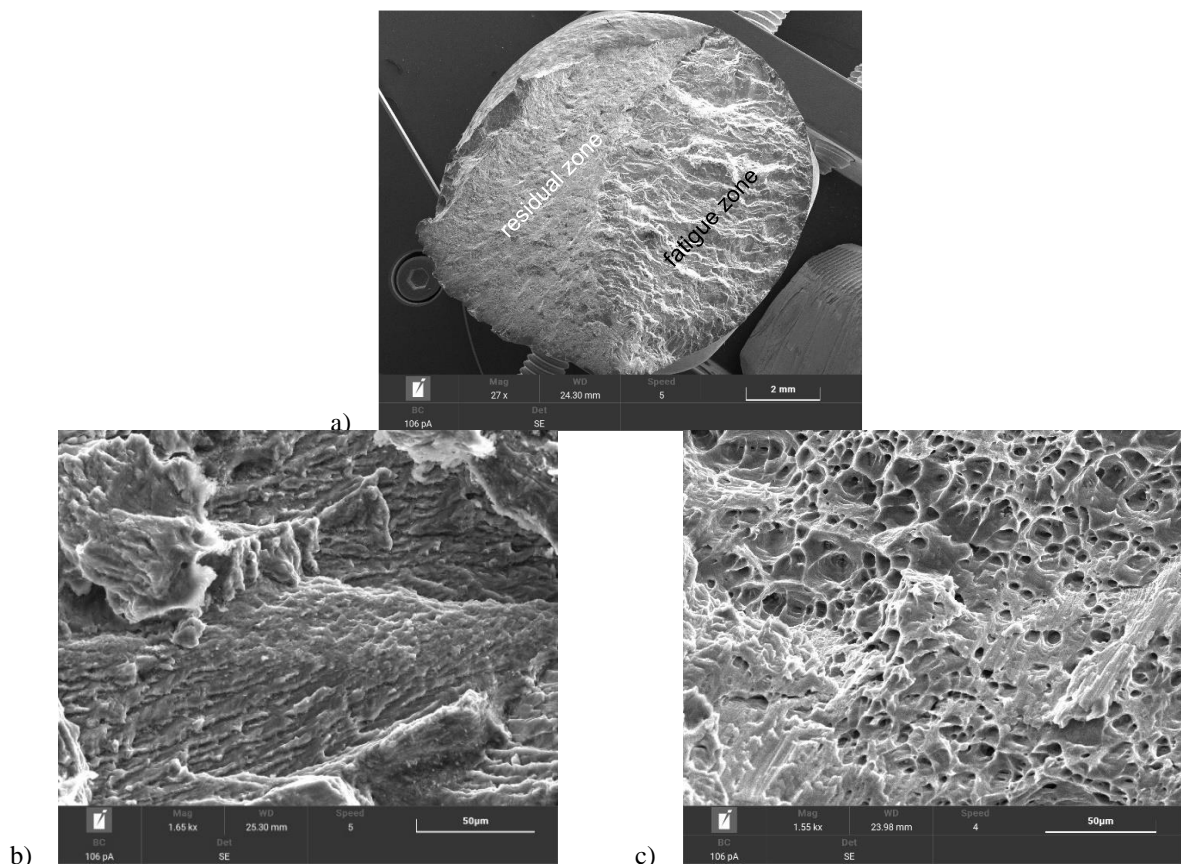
Fatigue fracture of the alloy after T64 treatment caused by combination of bending and torsion $\tau_a = \sigma_a$, a) fracture morphology, b) fatigue bands in the fatigue zone, c) surface in the area of the residual zone (specimen 54 – 2 206 384 cycles).
